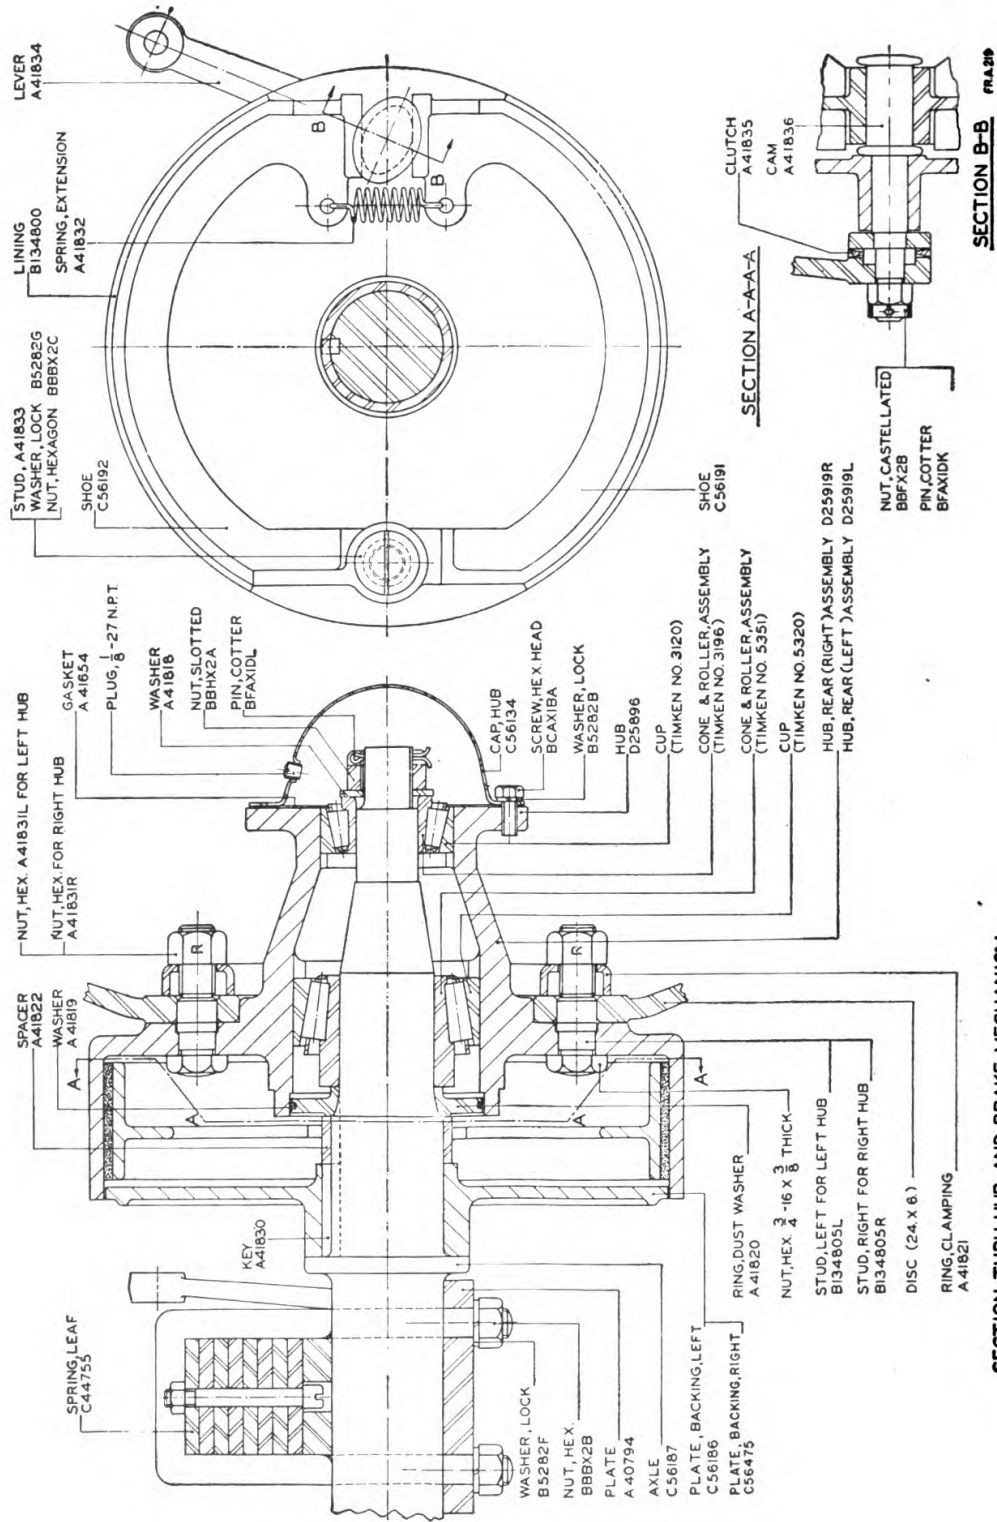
Sound locator trailer, M2—rear axle—sectioned views.
